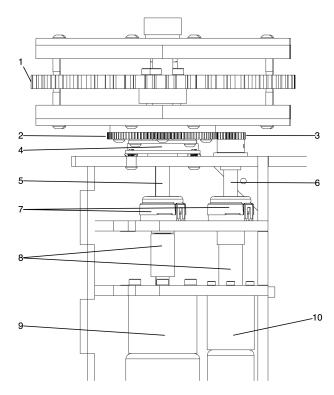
2 Degree of freedom hip joint of the v.2 Switchblade: (1) tread sprocket, (2) spur gear, (3) pinion gear, (4) optional slip ring, (5) main drive axle, (6) rotation axle, (7) optical encoders, (8) shaft couplers, (9) tread motor, and (10) rotation motor.
